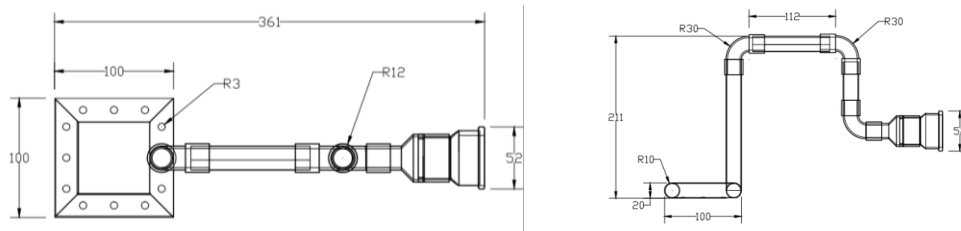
Plan and side views (a,b) of pipe and connectors the dimension (mm)
